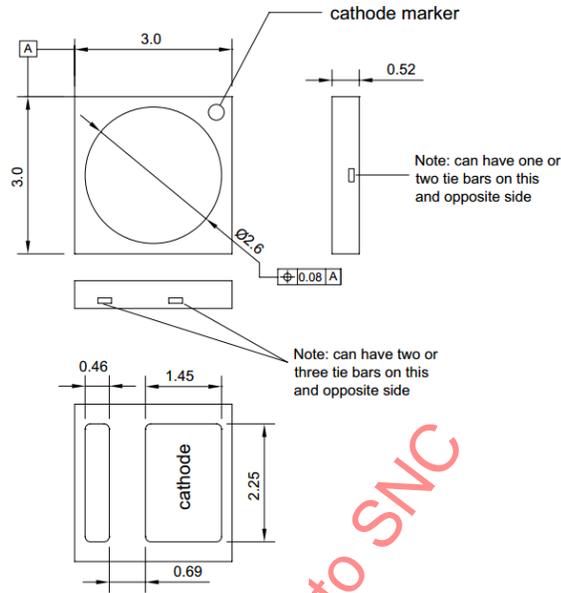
Mechanical Drawing for LUXEON 3030 2D. All dimensions are in millimeters.
